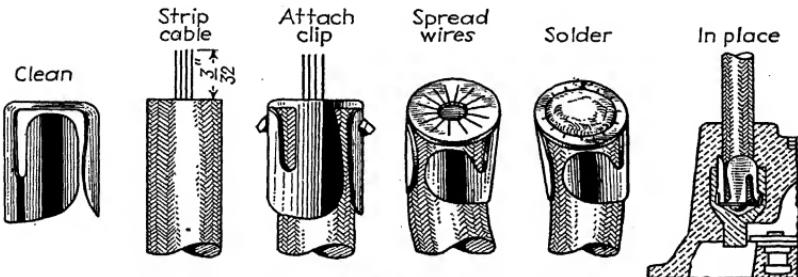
A method of soldering spring clips to cable ends to ensure good contacts.
